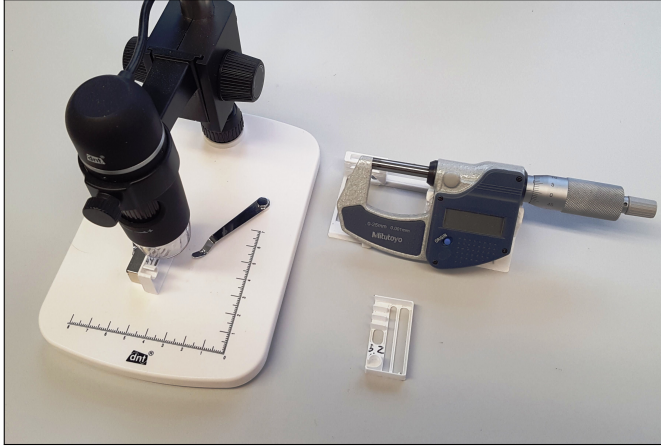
The entry level digital microscope, test piece and the micrometer, mounted on a 3D-printed stand, which were used for the measurements.
